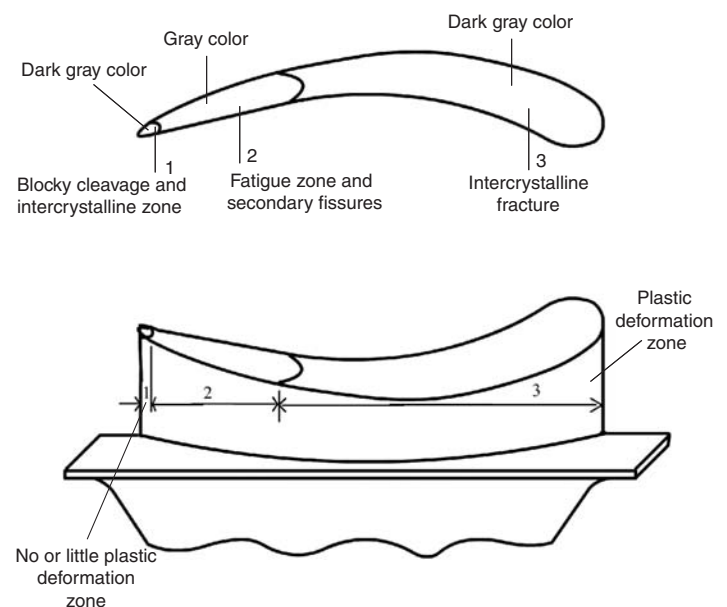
Sketch showing the zones in the failed turbine blade
